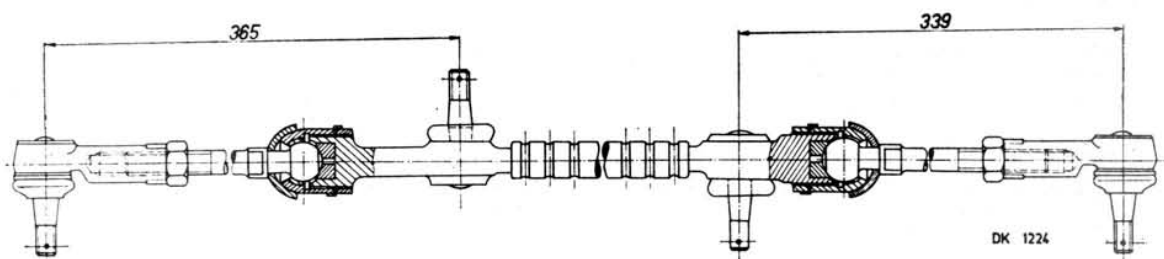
/1 - Assembly and Adjustment of Steering Linkage
